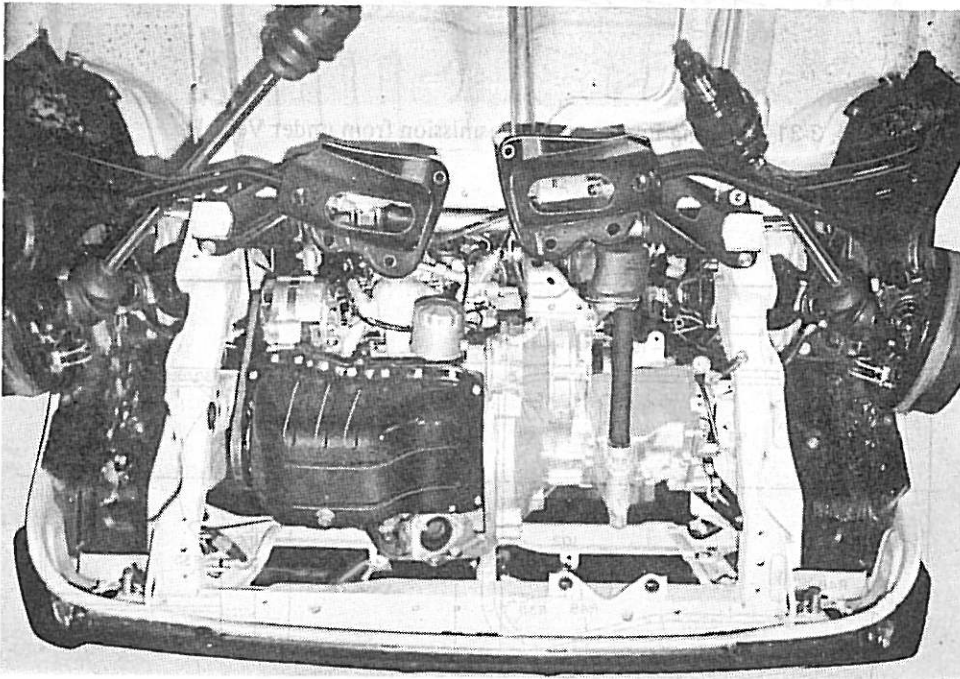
Underside View of Engine and Other Related Parts as Disassembled Partly
